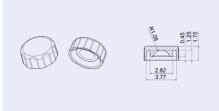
Schematic drawing and measurements of Mini Luer flat cap Fluidic 1230
